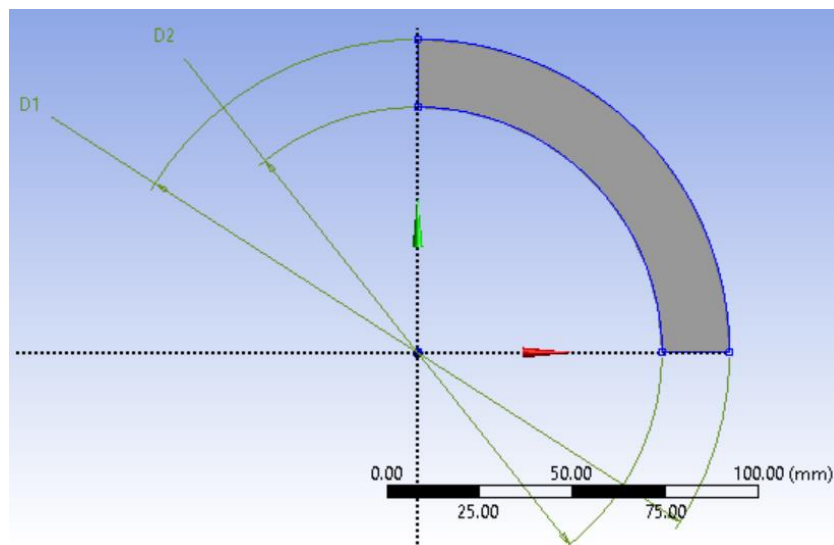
Two-dimensional design quarter for the pipe of 6-inch
